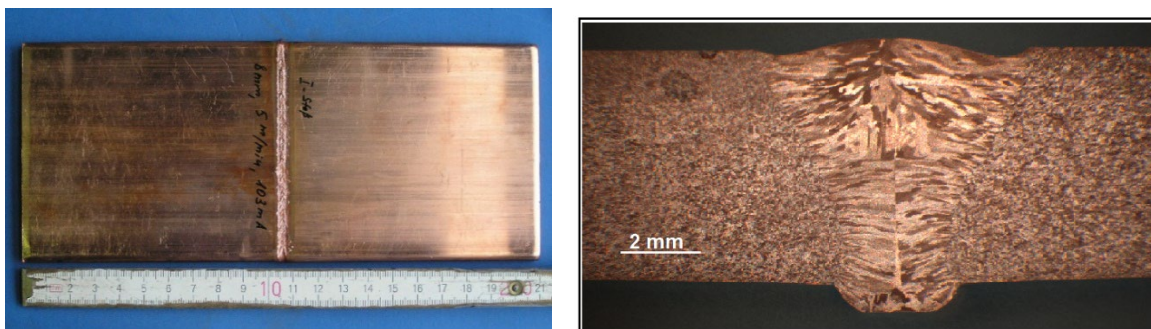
Weld seam and macro-section of copper ETP 6 mm Plate (welding speed 5 m/min, working distance 8 mm, beam current 103 mA)
